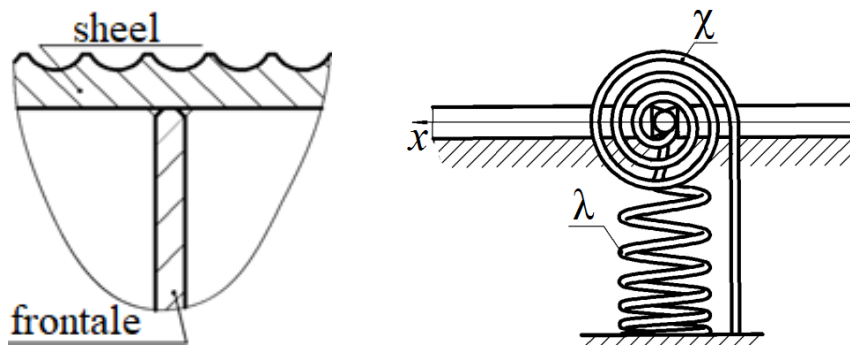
Replacing the joint between the shell and head with compression and torsion springs
